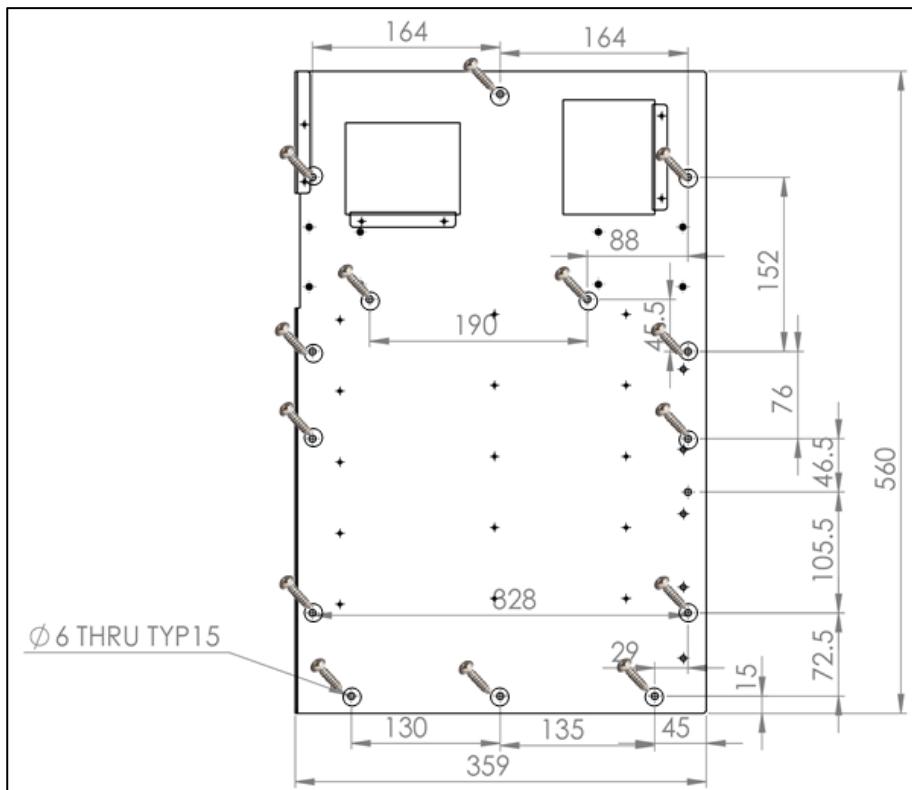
Platinum Pro 50 and Platinum Touch 50 Back Panel Dimensions
